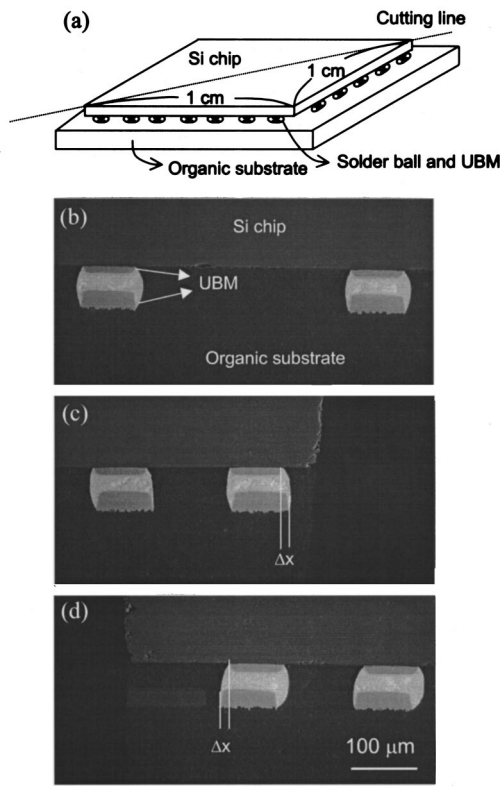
(a) Schematic diagram of eutectic SnPb solder bumps between a flip chip and a FR4 board. (b) Cross-sectional SEM images of a solder joint in the center part of the chip, where the alignment between the top UBM on the chip and the bottom bond-pad on the board is good. (c) A joint at the right-hand side corner of the chip, where the bottom bond pad on the board has been displaced to the right by about $10 \mu\text{m}$, relative to the upper UBM on the chip. (d) A joint at the left-hand side corner of the chip, with the same displacement of the bond pad but to the left (after Ref. 58).
